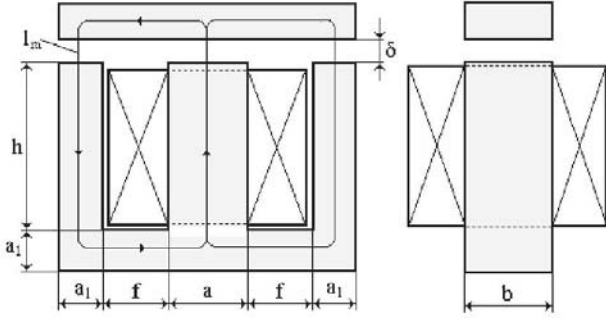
The dimensions of the coil inductor with iron core of E - I type.
